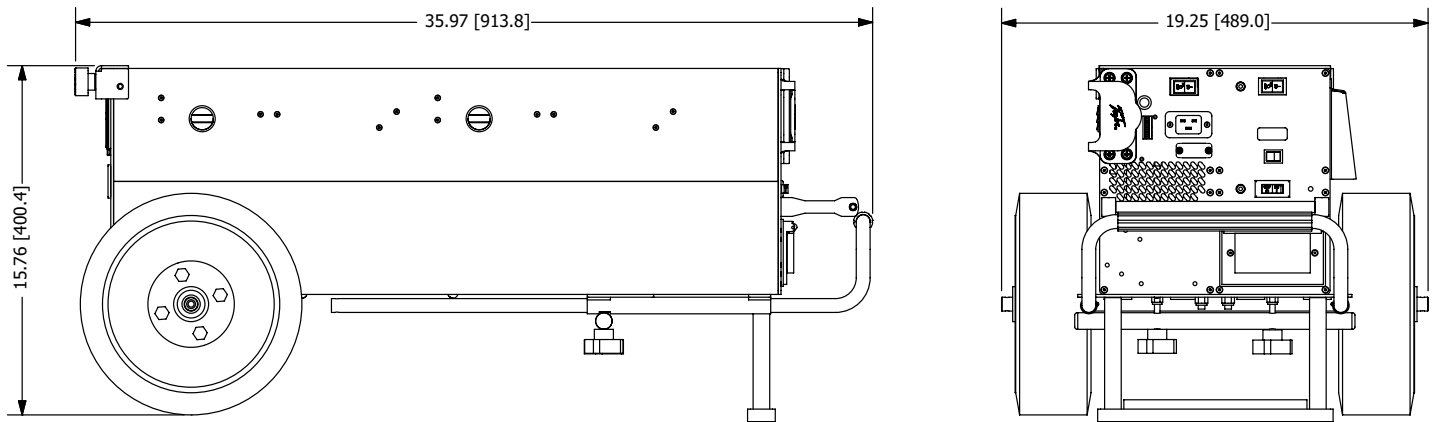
TI3000 GPU-24-INV-1800 physical dimensions
